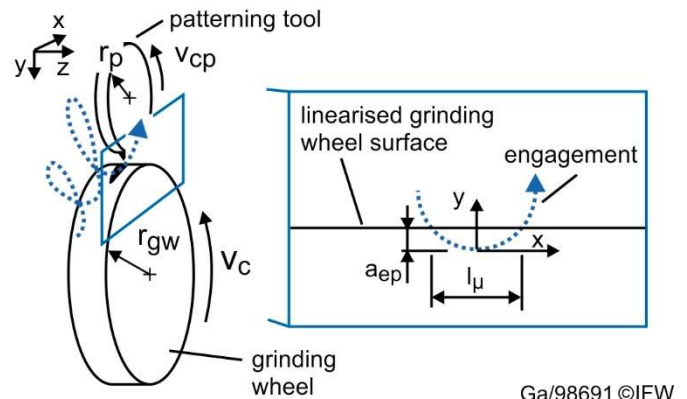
Model of engagement of patterning tool into linearised grinding wheel surface
